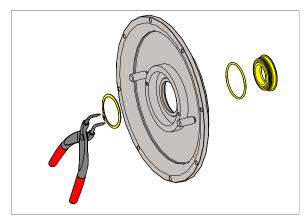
Remove the rotary parts of mechanical seal.
